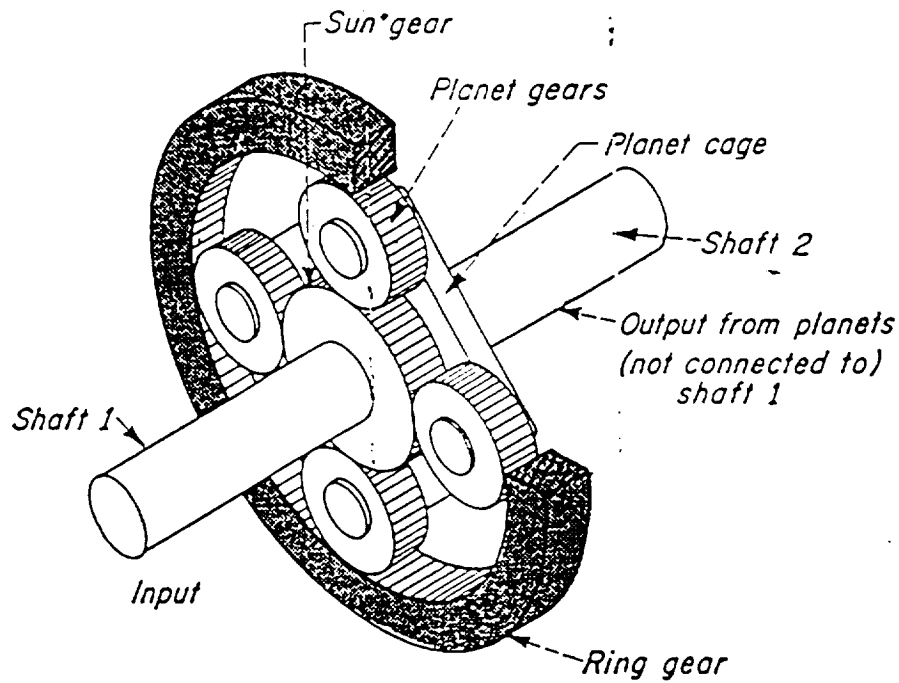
Planetary torque applier. Shaft 1 is connected to one set of gears and shaft 2 to the other set of gears. There is a constant ratio between shafts 1 and 2 as long as the ring gear is stationary. Rotating it introduces relative twist between the shafts. The ring gear can be accurately adjusted to give desired torque.
